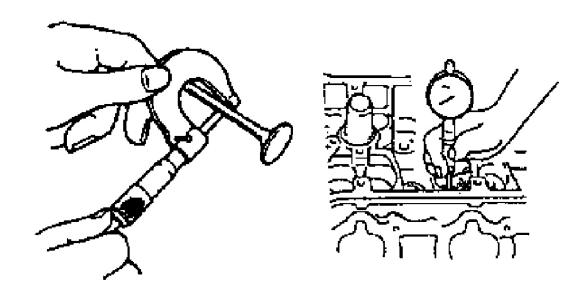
Checking Diameter Readings On Valve Stems Courtesy of SUZUKI OF AMERICA CORP.
